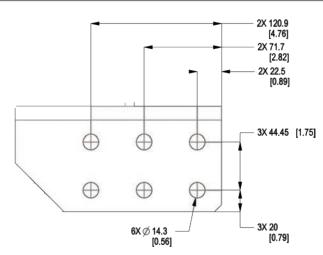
C-Cab XXL AC Busbar arrangement with Dimensions (mm[in])
